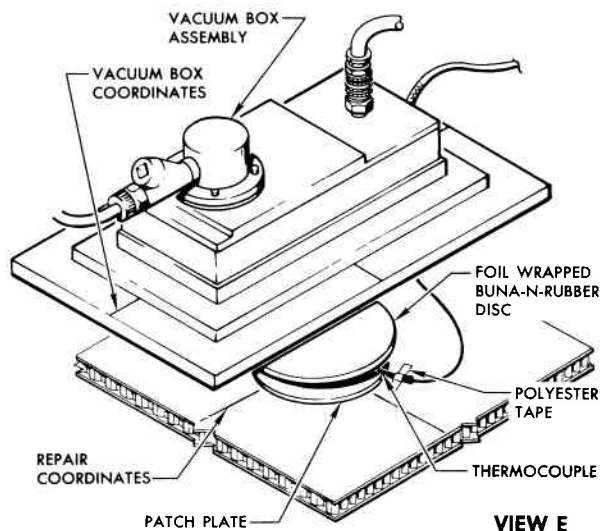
Honeycomb Repairs — Vacuum Box Assembly (Sheet 1 of 2)
